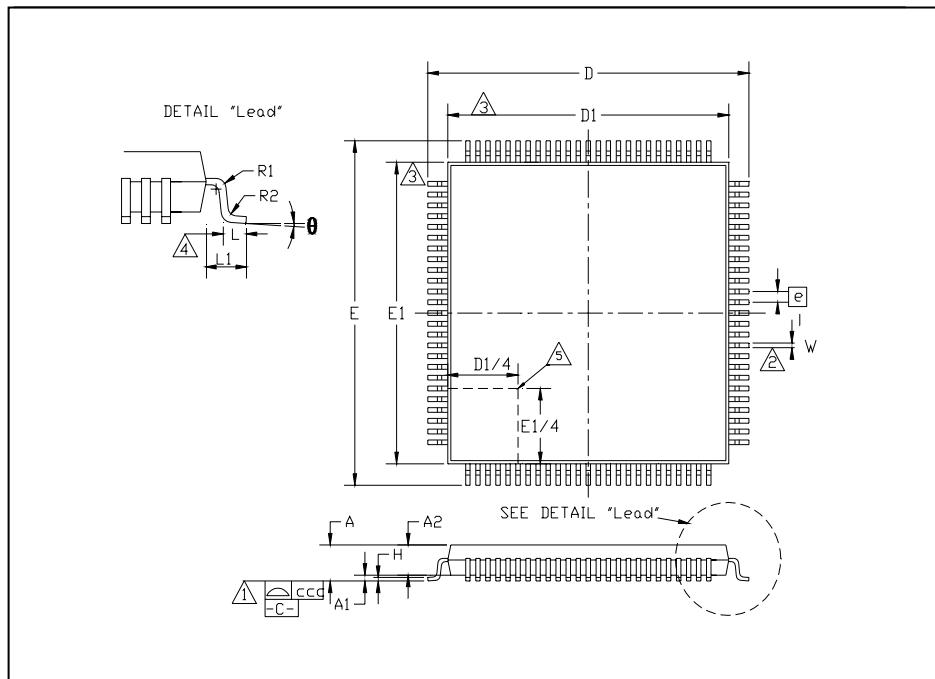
100 Pin STQFP Package Outline, 12x12x1.4 Body, 2MM Footprint (Rev A)
